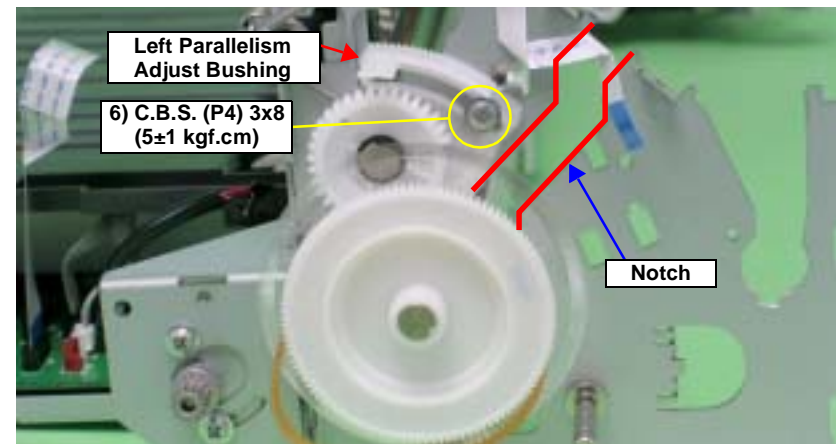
Rotating the Left Parallelism Adjust Bushing
